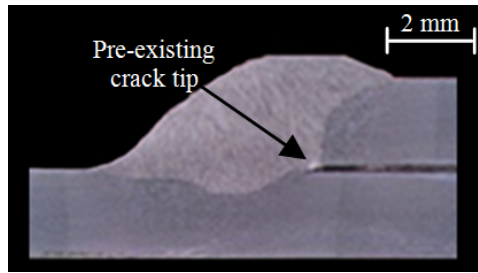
The micrograph of the cross section of a specimen with a weld length of 25 mm and a sheet thickness of 2.0 mm.
